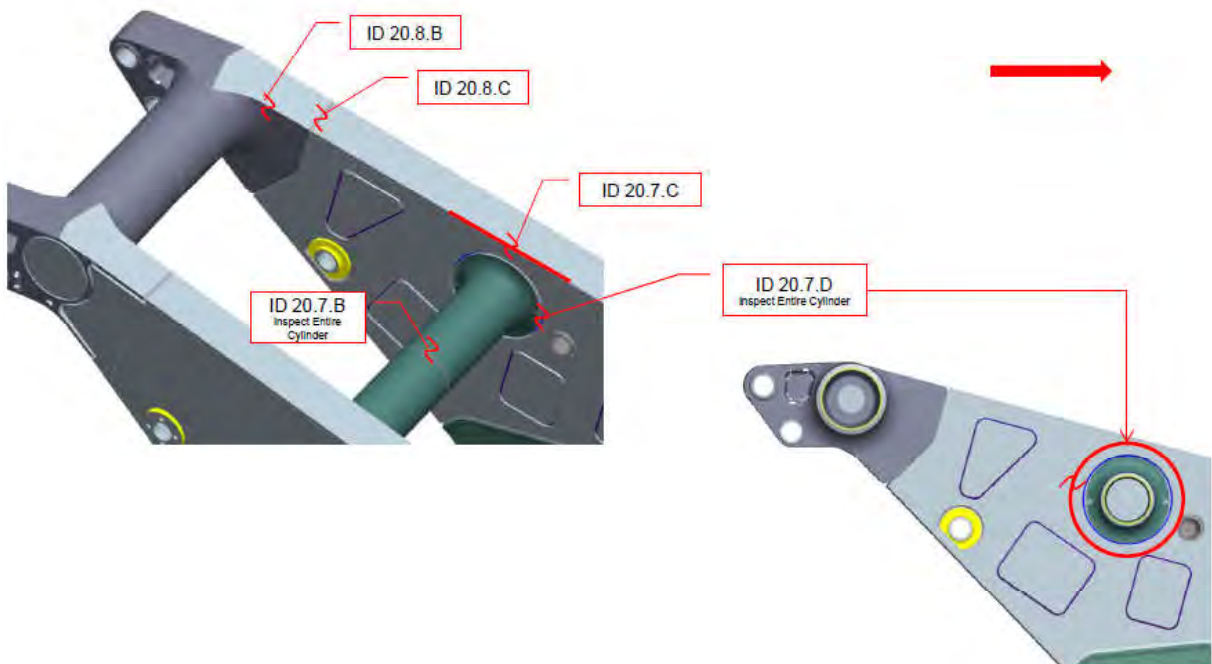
Chassis Inspection Guideline: Driver Side Upper Mid Tube and Dump Pivot Castings
